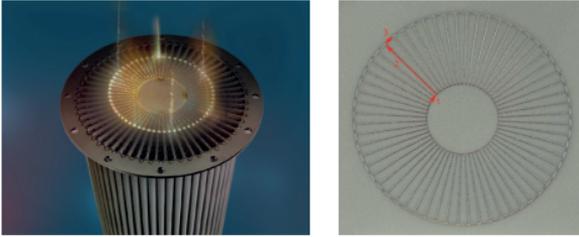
Welding with 60 beams on a soot filter (left). Welding sequence with 60 beams; example for one beam (right).
